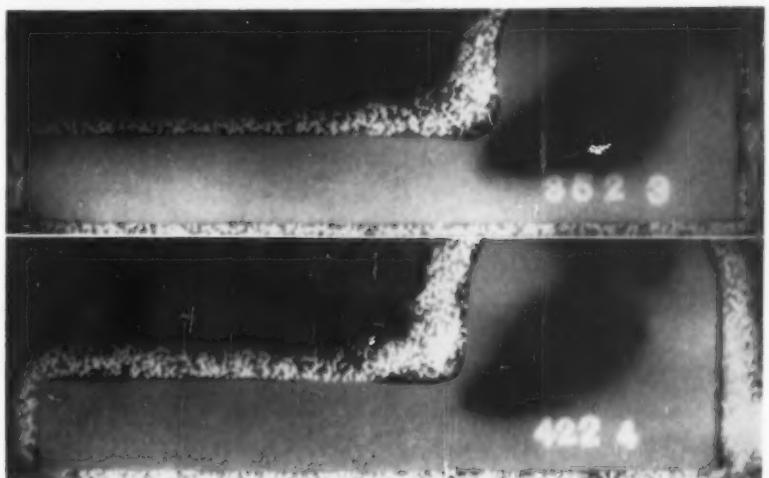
Sound casting with riser adequate to feed 5 in.
